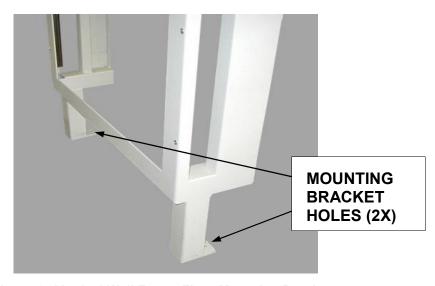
Vertical Wall Frame Floor Mounting Brackets
